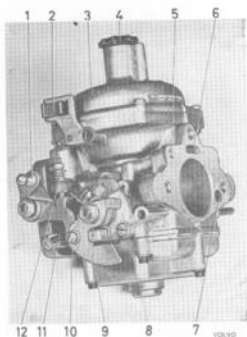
Stromberg-carburetor, left side, B 20 A
